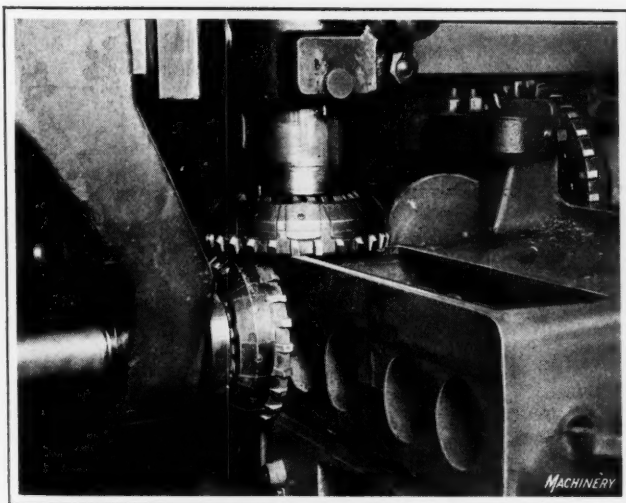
Milling Machine with Auxiliary Brace for Side Spindle
